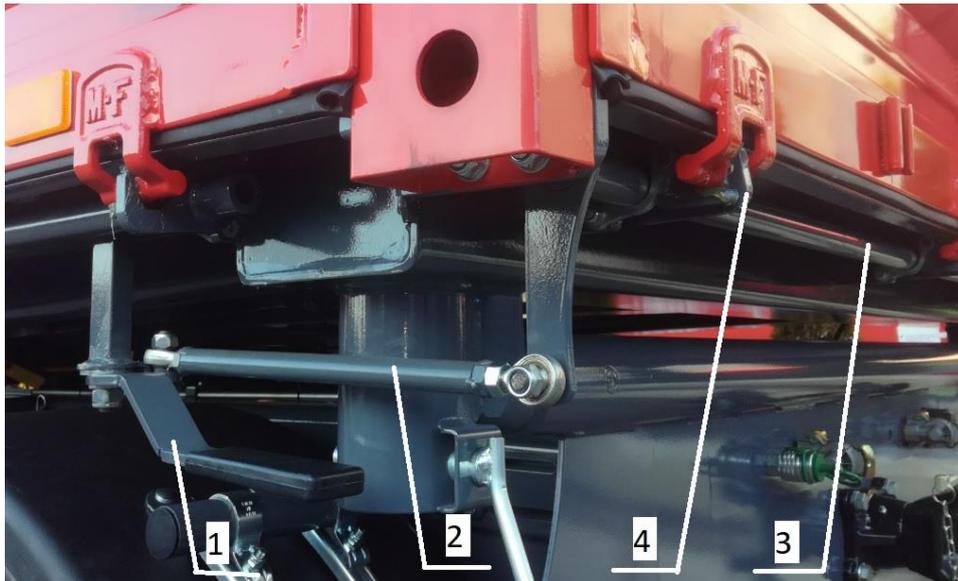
The locks on the sideboards of the load-carrying body: 1 – central lever of the bottom locks, 2 – lock adjustment mechanism, 3 – central lock shaft, 4 – lock
